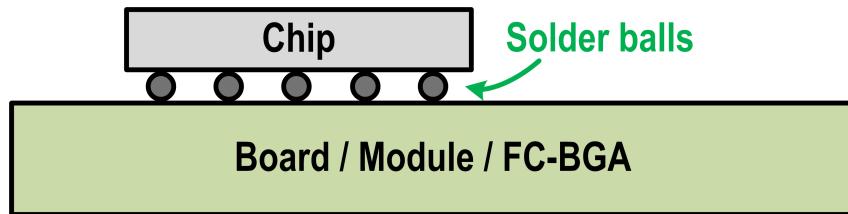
Solder balls from chip to board, module or FC-BGA package.
